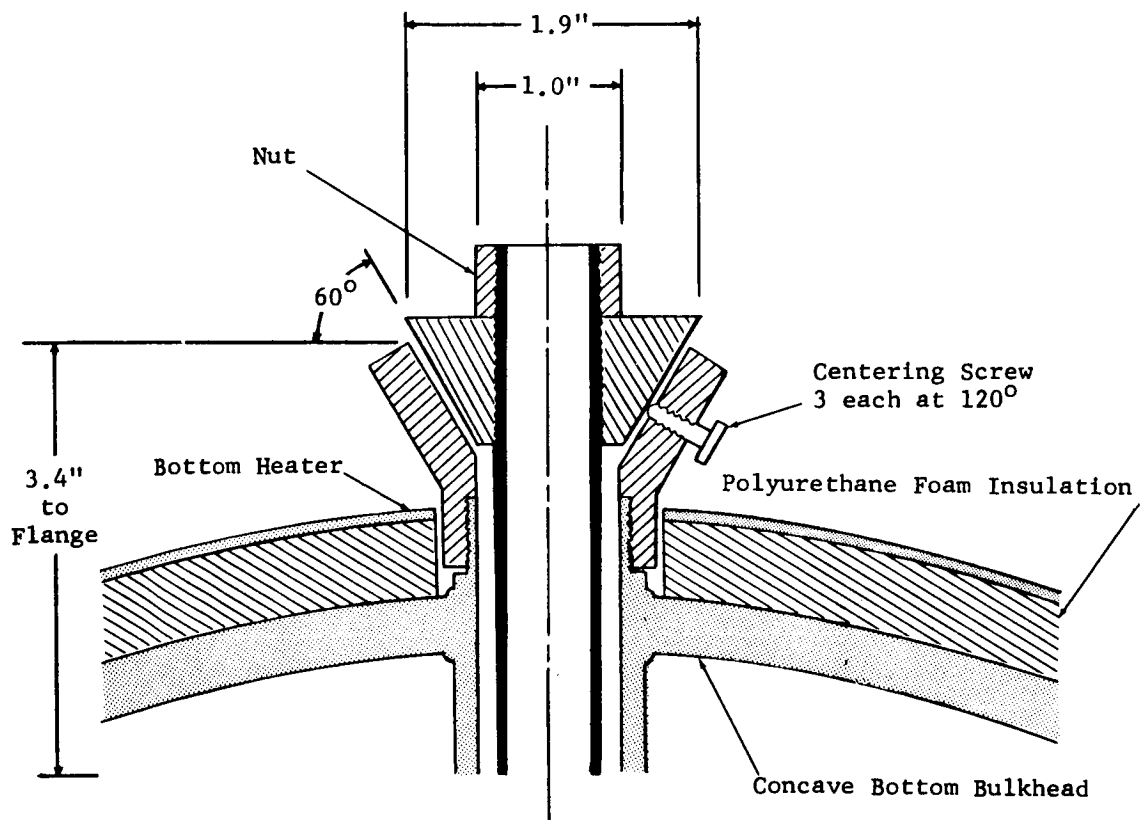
Schematic of 60° Jet Nozzle Assembly
